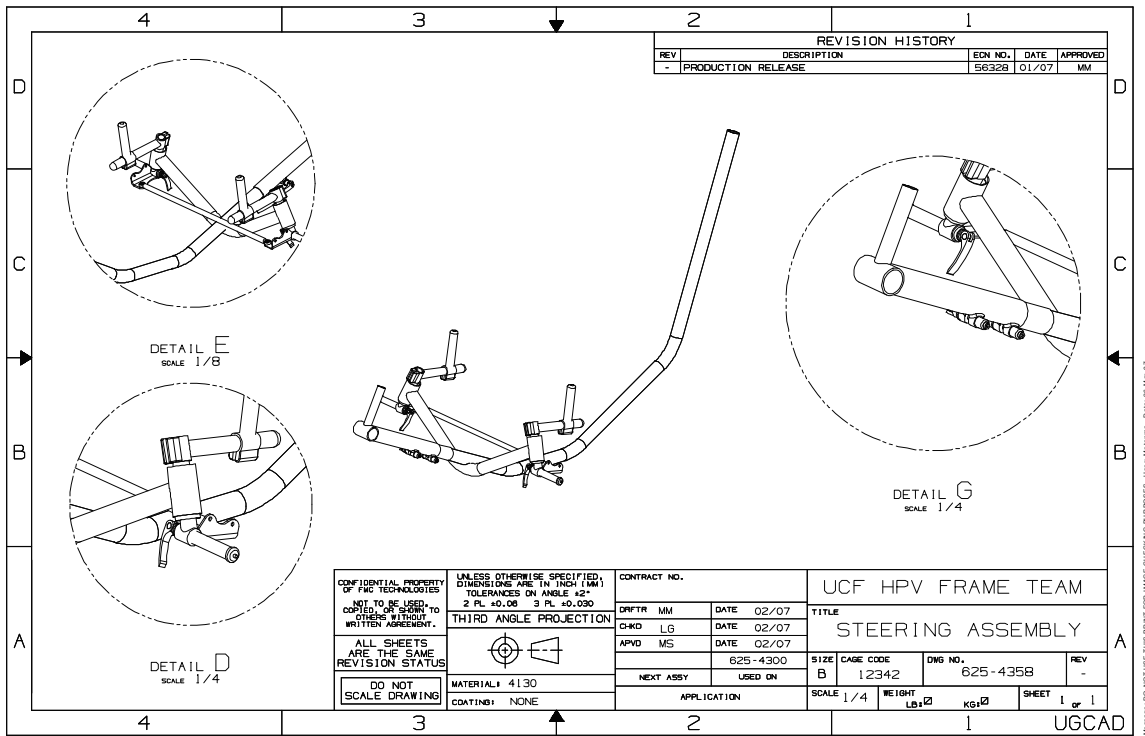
Detailed Drawing of Steering and Boom Arm Assembly.
